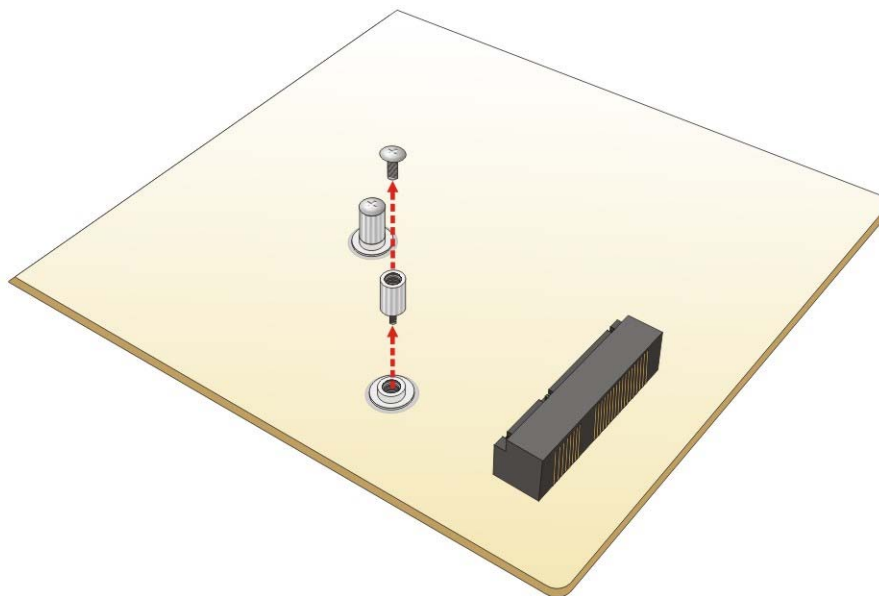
Removing the Retention Screw and Standoff for a Half-size PCIe Mini Card
